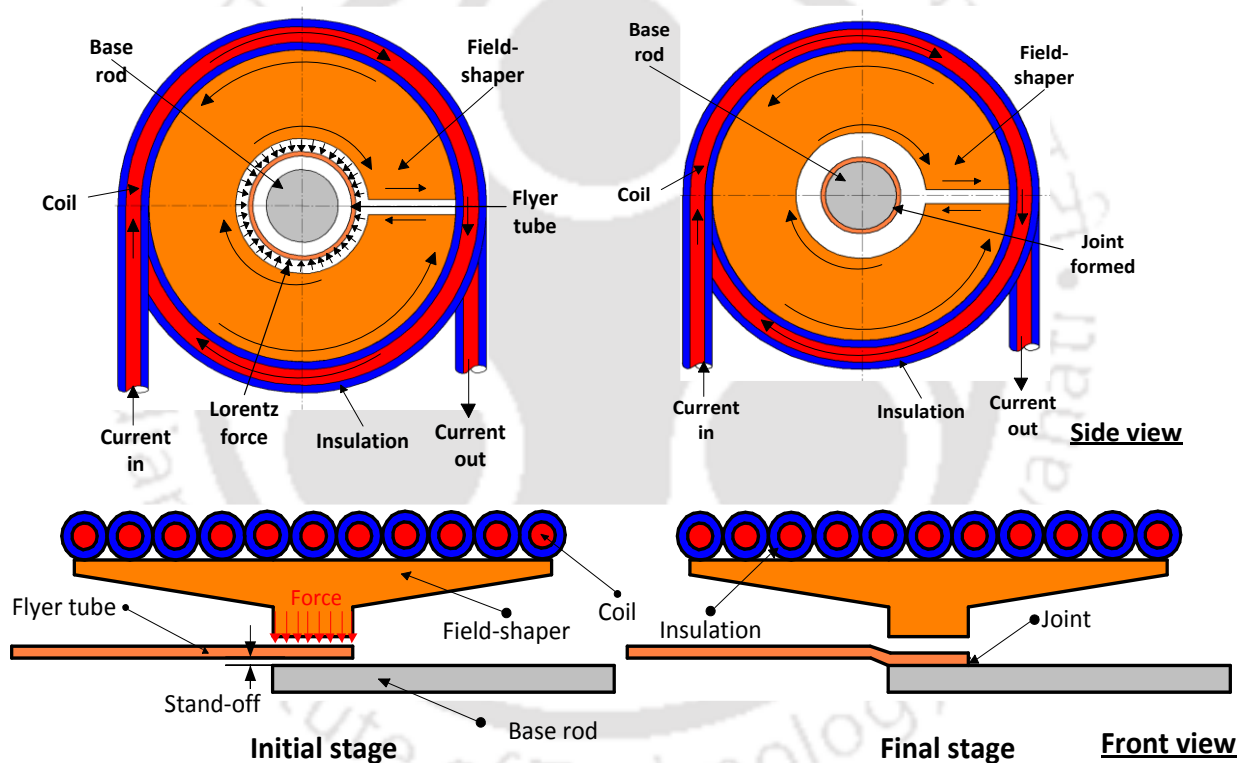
Initial and final stages of the EMC process (side view and front view)
